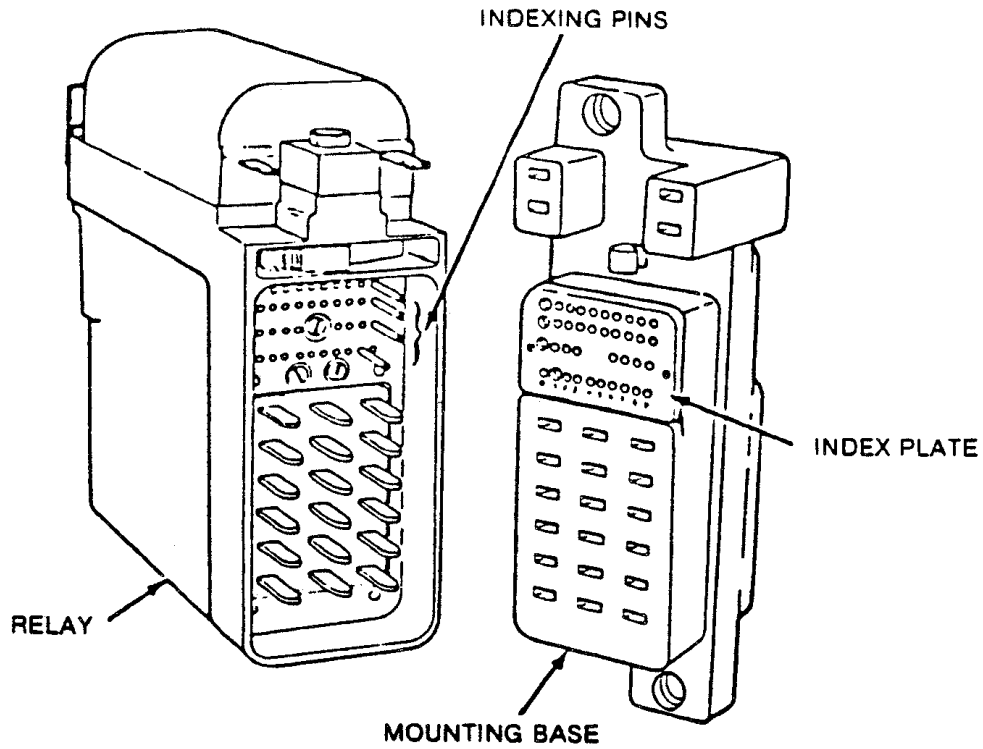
TYPICAL PLUG-IN RELAY AND MOUNTING BASE
